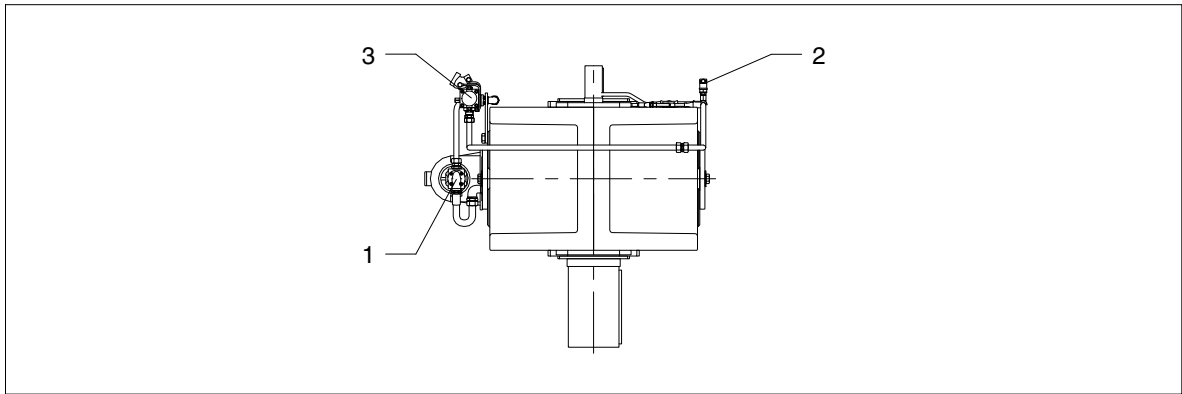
Add-on oil-supply system with motor pump in case of type H..V
